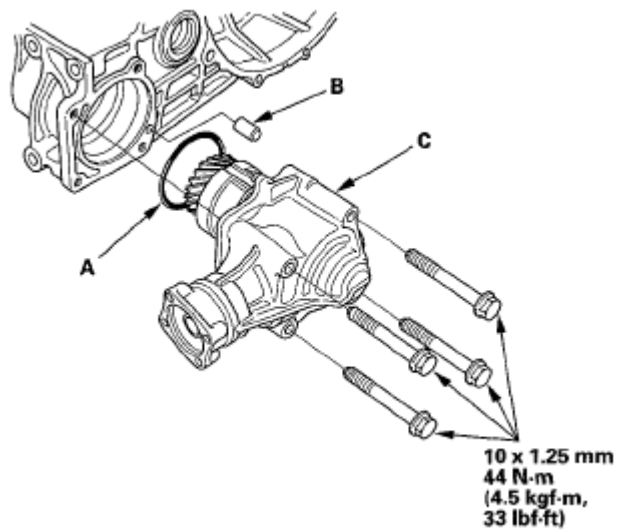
Identifying O-Ring, Dowel Pin And Transfer Assembly With Torque Specification
